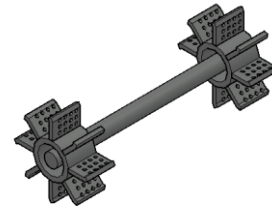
Design of paddlewheel with 12 holes 2.6 cm diameter blade
